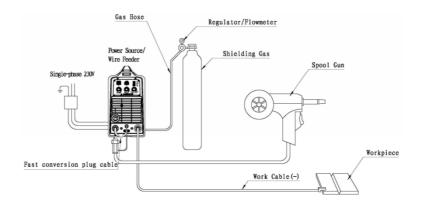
Installation - MIG/MAG welding with pull torch
